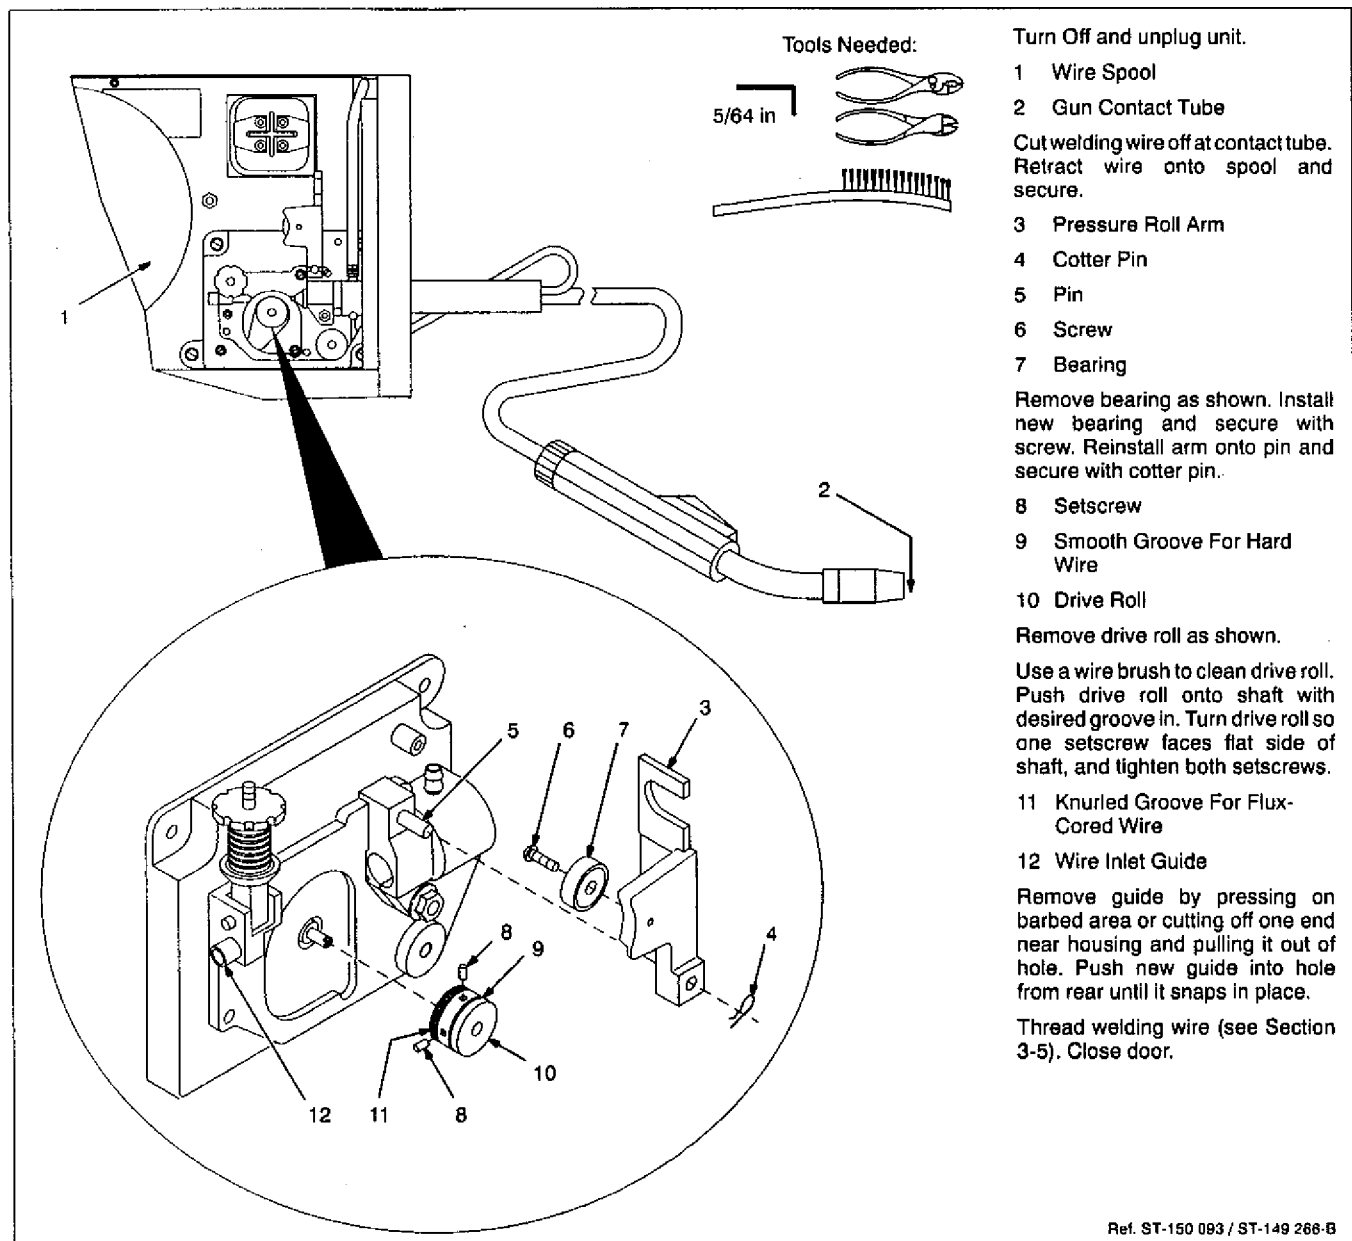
Removing Drive Roll, Drive Bearing, And Wire Inlet Guide
